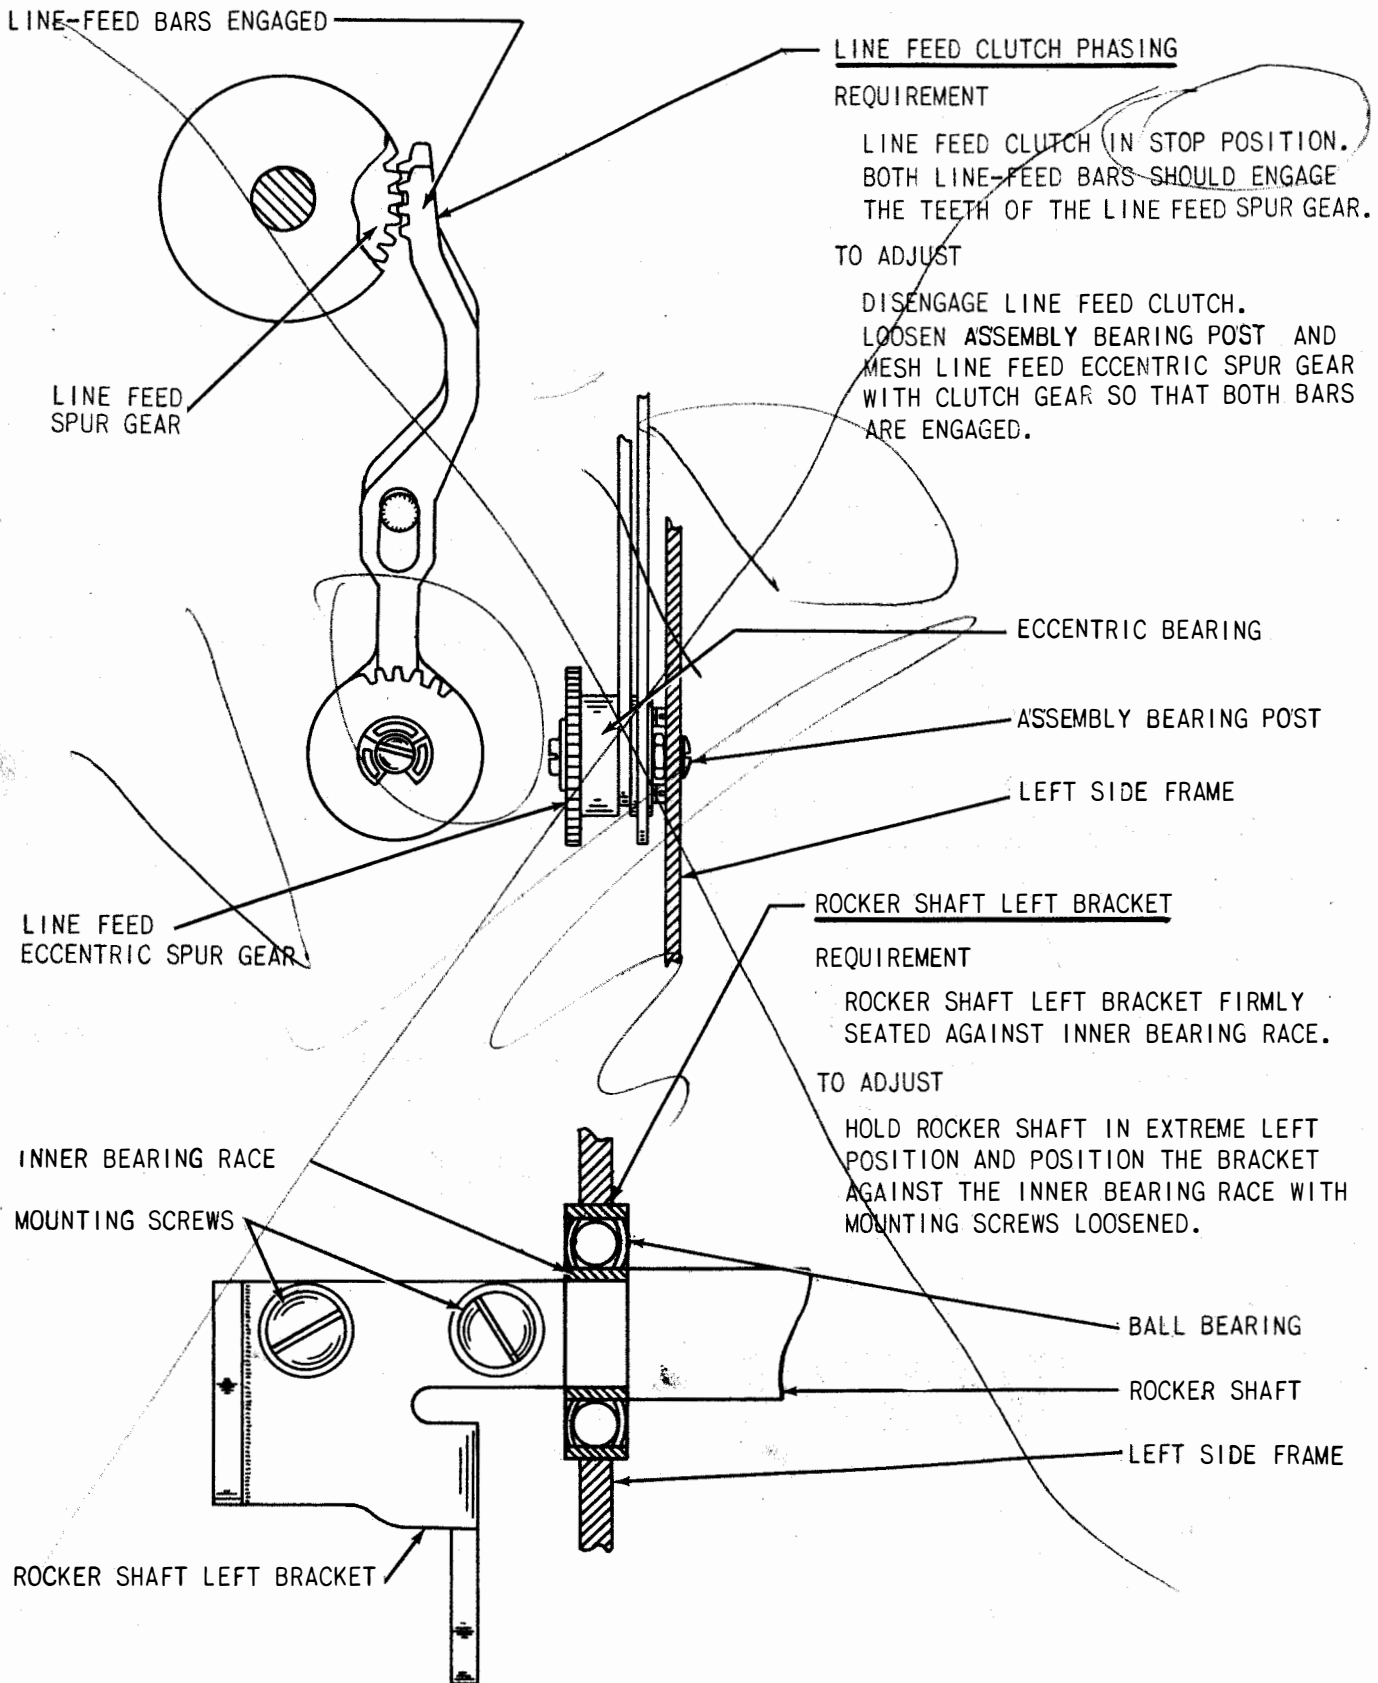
Automatic Typewriter, Line Feed and Rocker Shaft Mechanism
